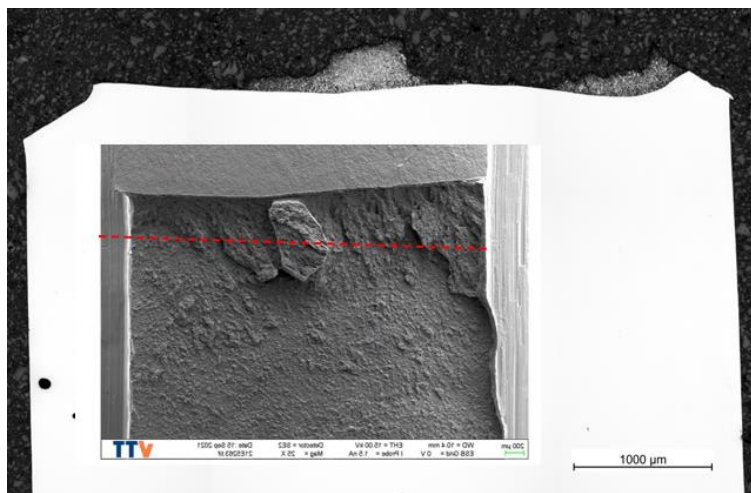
Series +0.3 mm. A high/moderate toughness specimen. The red line indicates the location for the cross-cut on the fracture surface. The cross-cut shows that the crack deviates towards the FB and propagates along the FB. Initially the fatigue pre-crack is located farther from the FB.
